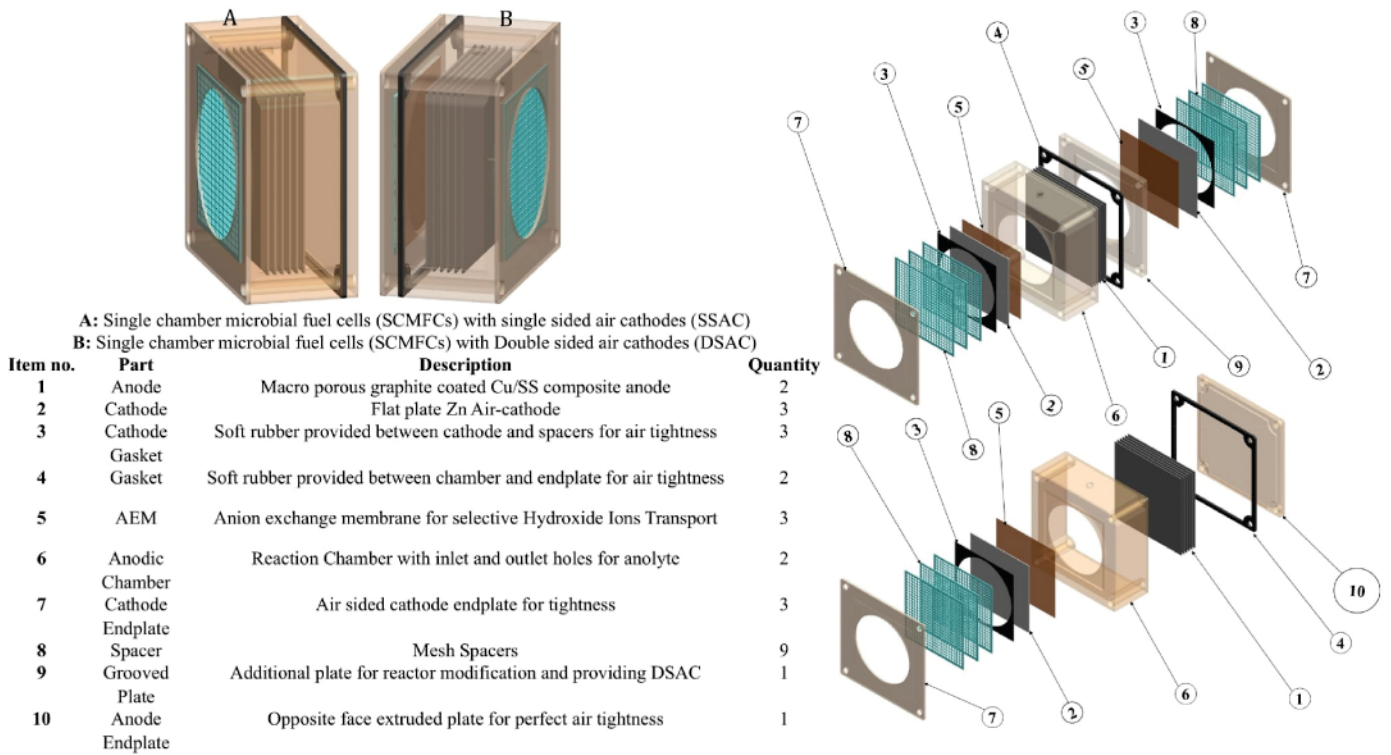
Exploded view of two reactor modules with assembly and bill of material (BOM).
